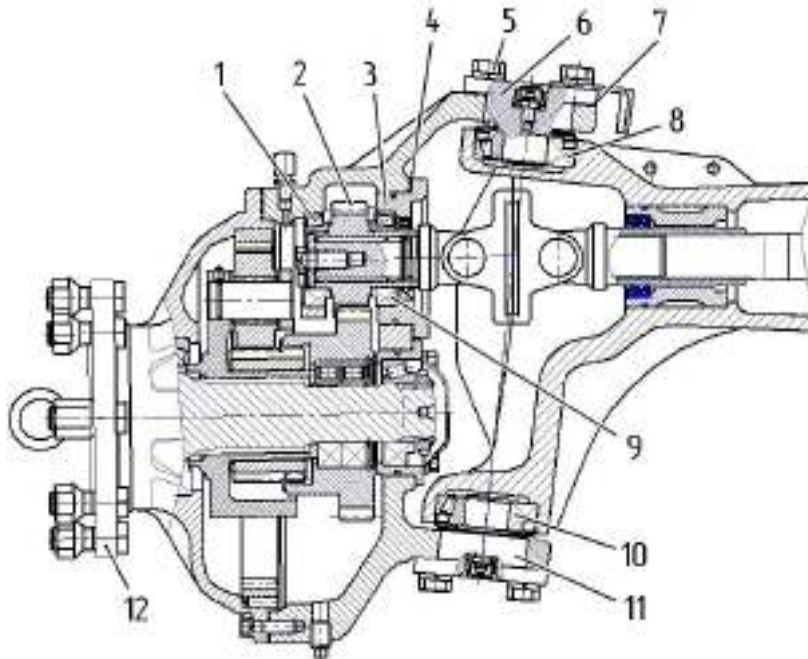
Lubricating of RLL turning shaft bushings
